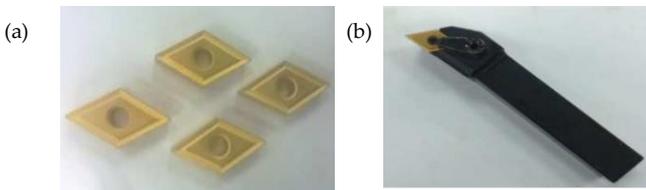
(a) Carbide turning tool insert and (b) tool holder
